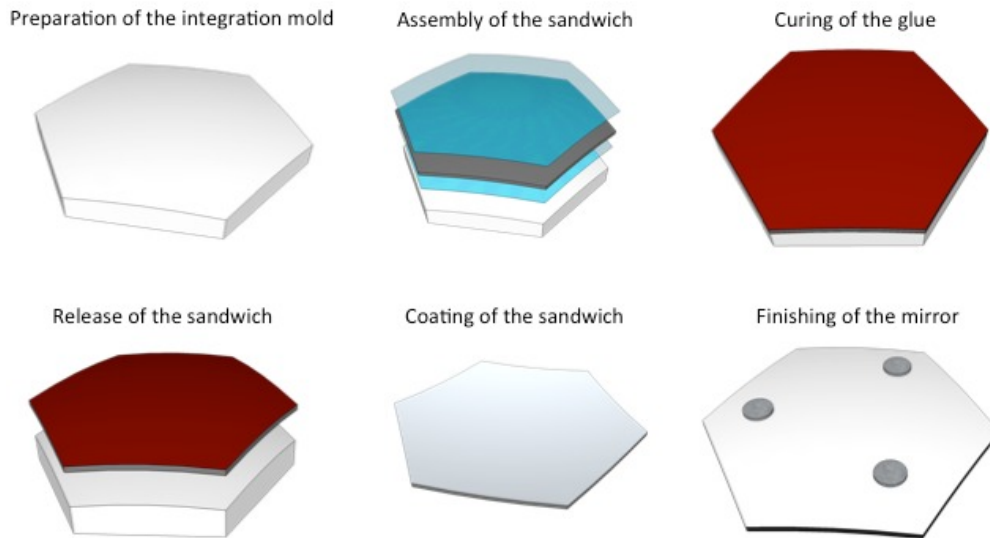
Main steps for the cold-shaping technology. The sandwich structural configuration is implemented with a honeycomb core a few cm thick and skins made by glass foils kept together with epoxy resin.
